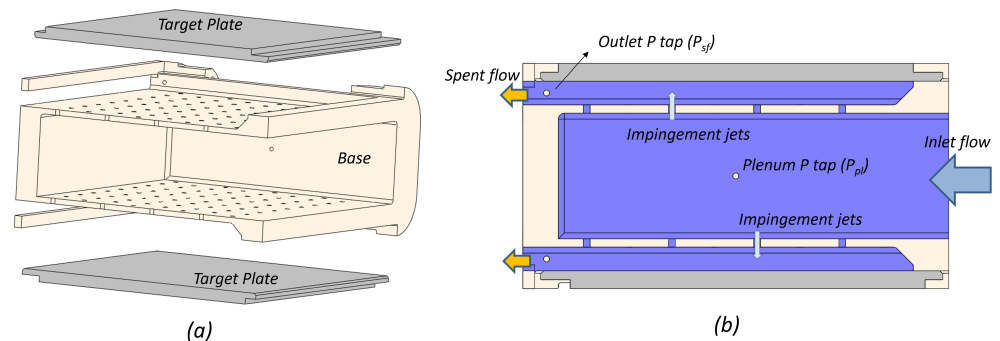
(a) Exploded view of the coupon assembly and (b) sectional view of the assembled coupon (©2024 Baker Hughes Company—all rights reserved).
